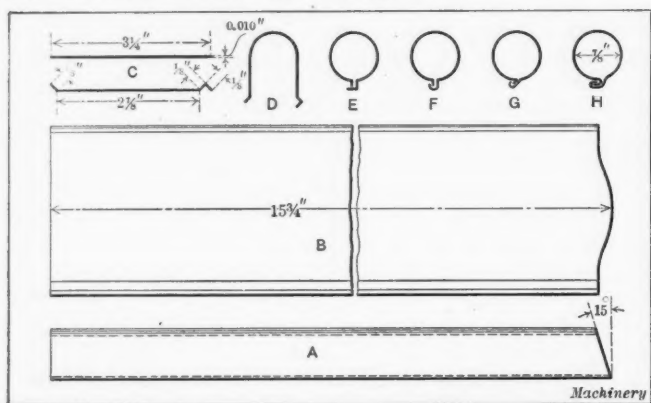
Diagram showing Sequence of Bending and Forming Operations in producing the Tube in the Punch Press
